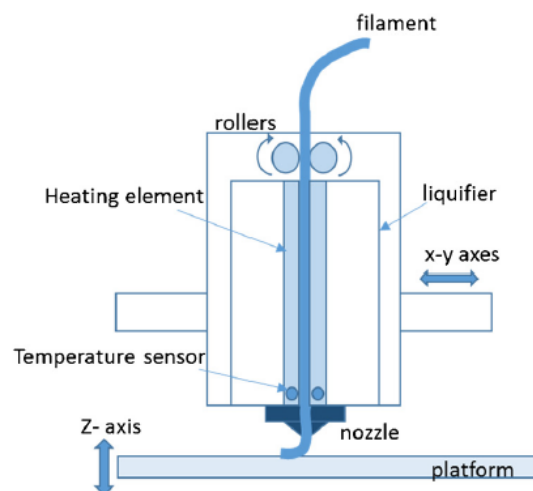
Schematic of fused deposition molding (FDM) process [8].
